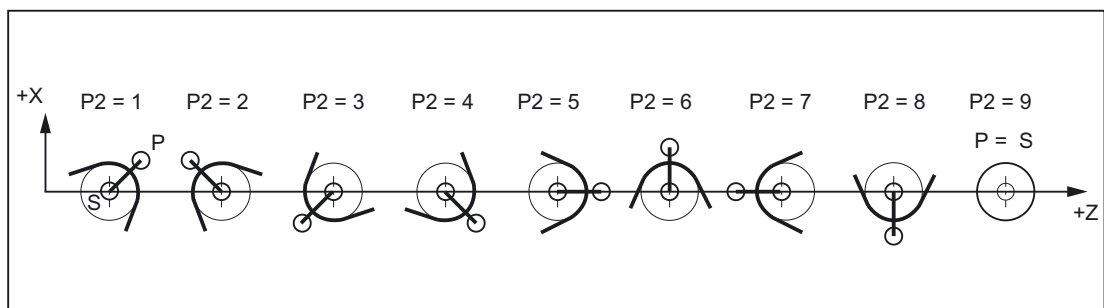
Tool parameter 2c (P2): Machining behind the turning center
